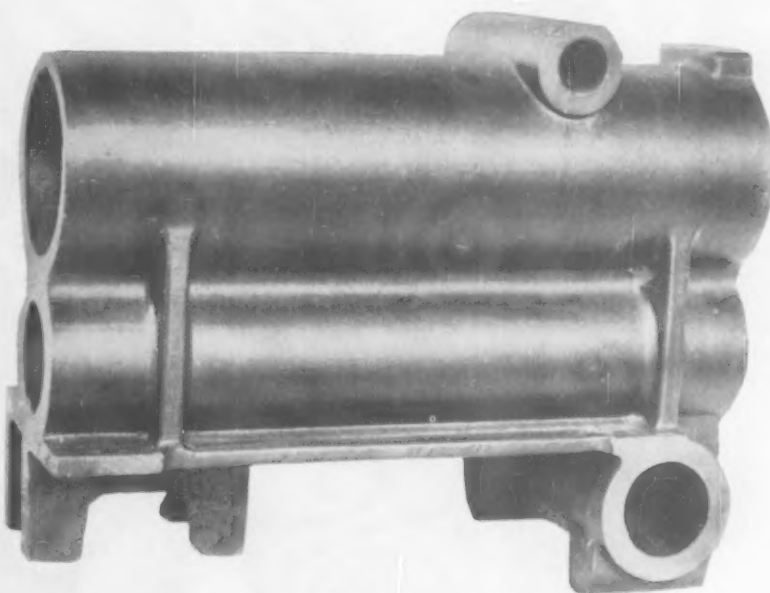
Welded machine tool spindle housing was redesigned for . . .
